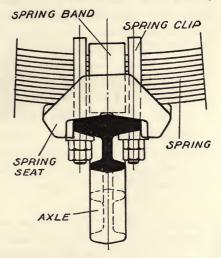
Mogul 6-Ton Front Spring Mounting.
